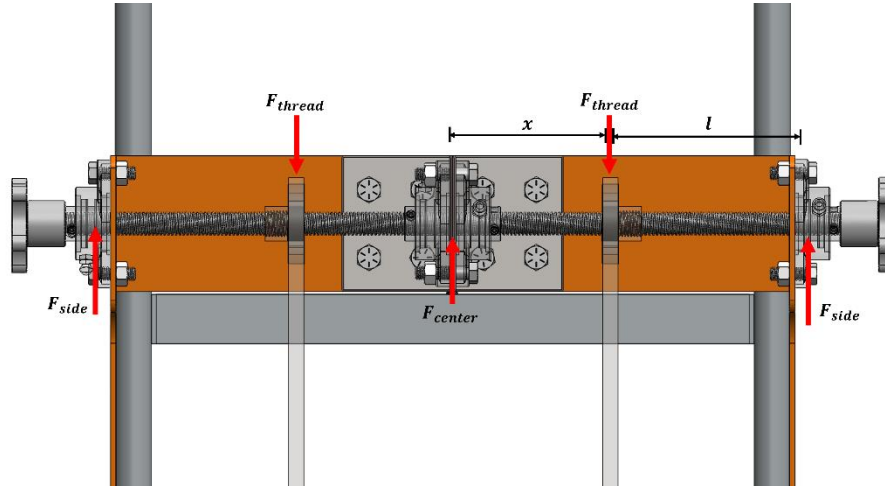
Resulting Forces Acting on Top Loading Assembly.
